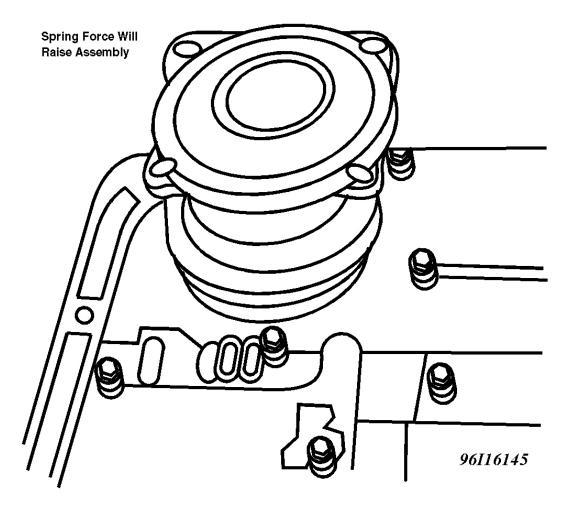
Removing Rear Servo Courtesy of FORD MOTOR CO.
